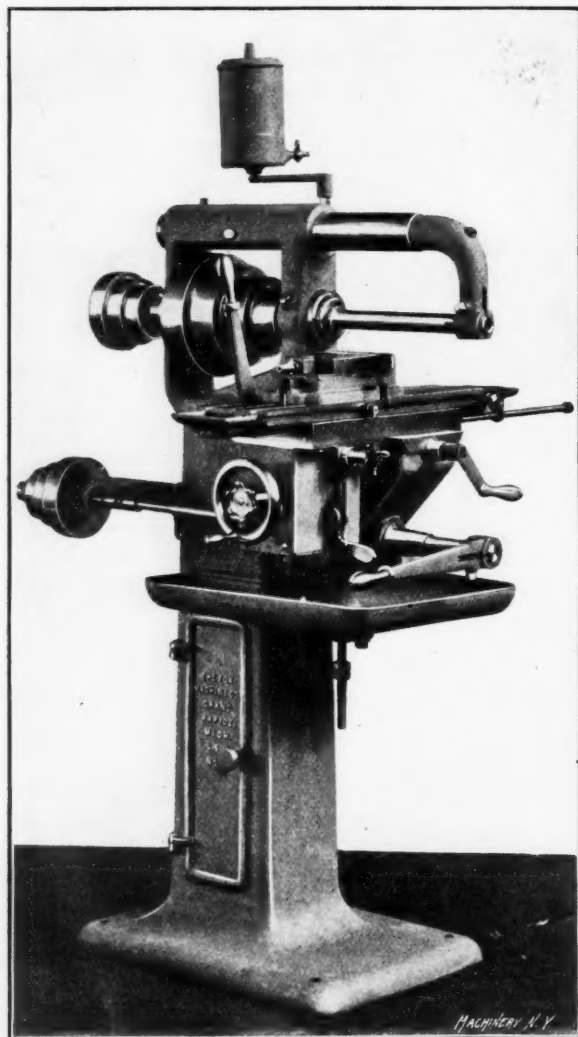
The Fox Hand and Power Feed Milling Machine.
